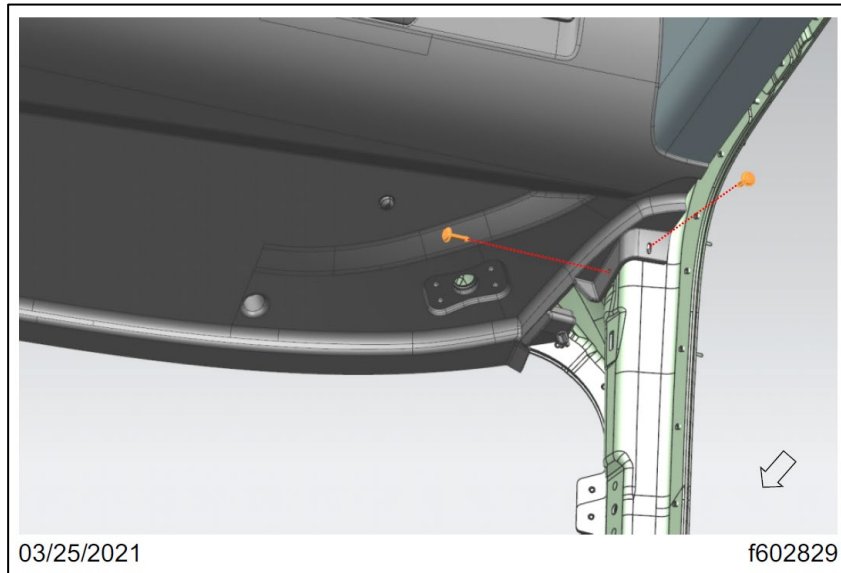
, Fasteners That Attach the RH Side Overhead Storage Assembly to the A-Pillar
